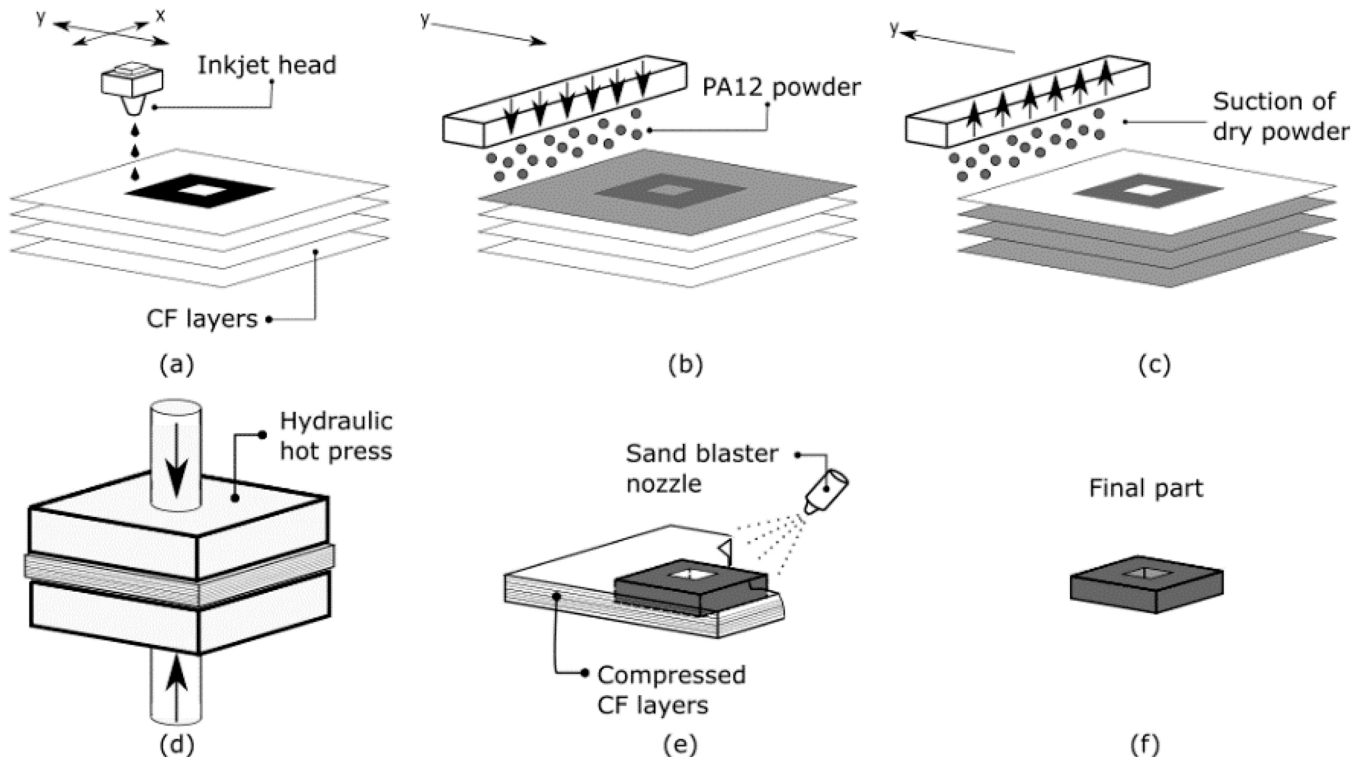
Composite fibre additive manufacturing approach (CFAM); (a) inkjet printing, (b) deposition of polymer powder, (c) removal of excess dry powder, (d) hot press process, (e) removal of excess CF with sand blasting process, (f) final part.
